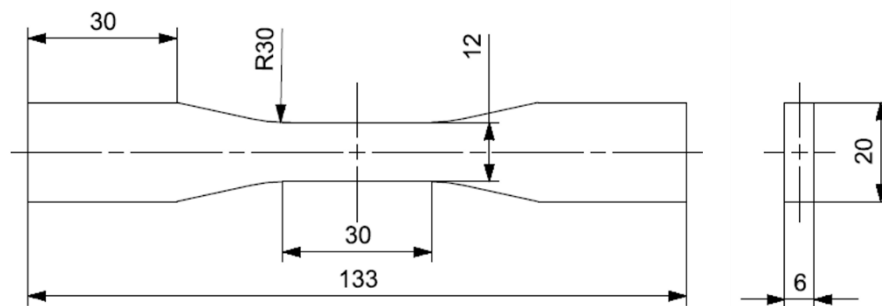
Geometry of AISI 304L dog bone specimens.
